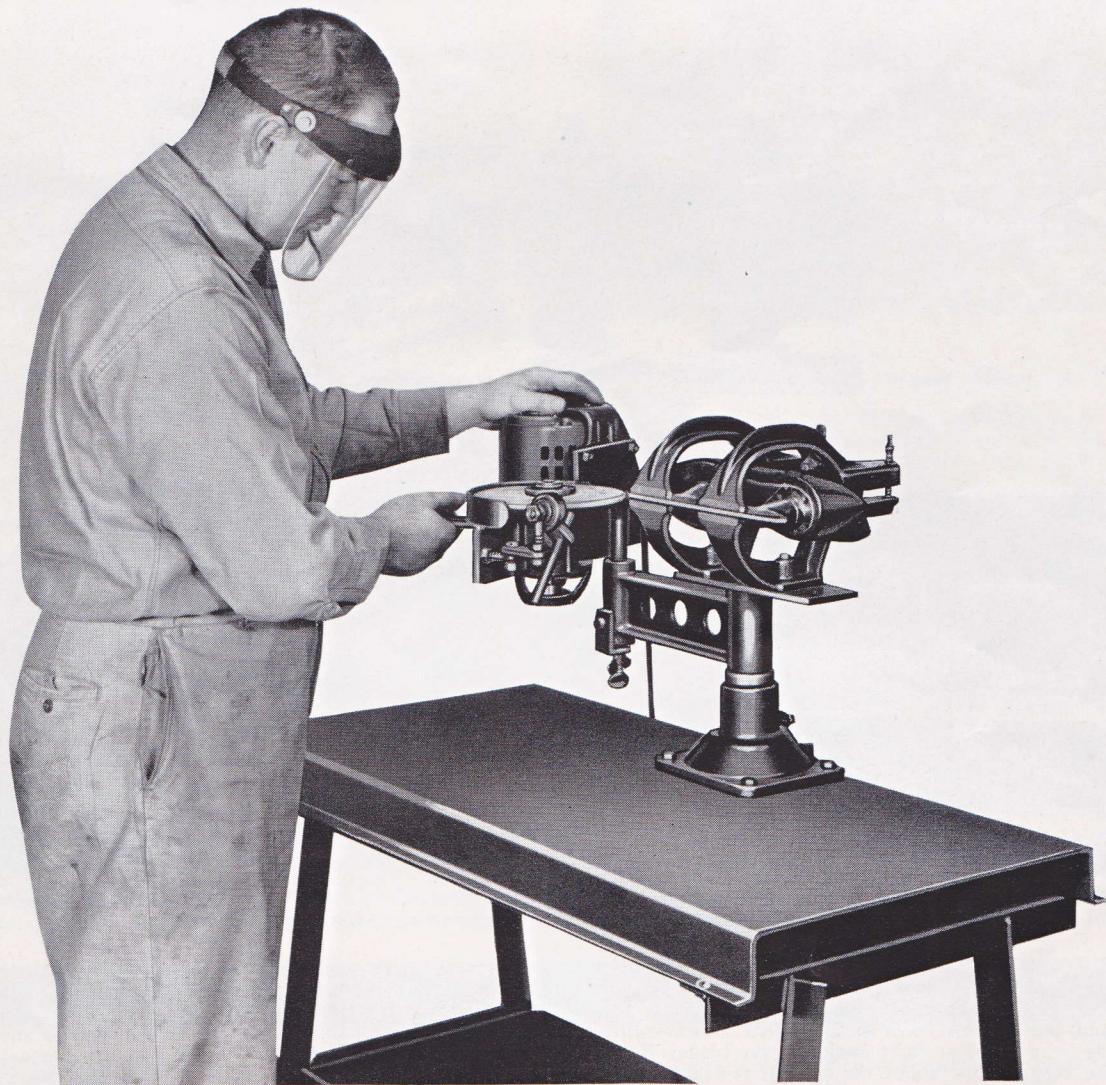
Punches, drills, and other tools can be sharpened by setting the guide in this position. The special wheel works very well on tool steel.
